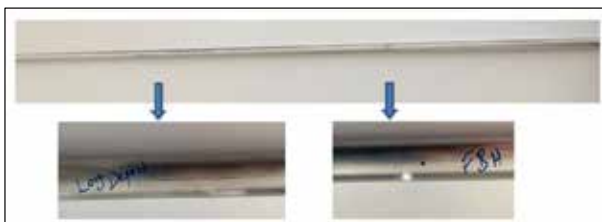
Long defect (LD) and Flat bottom hole (FBH) defects formed on 12 mm aluminum rod wire
